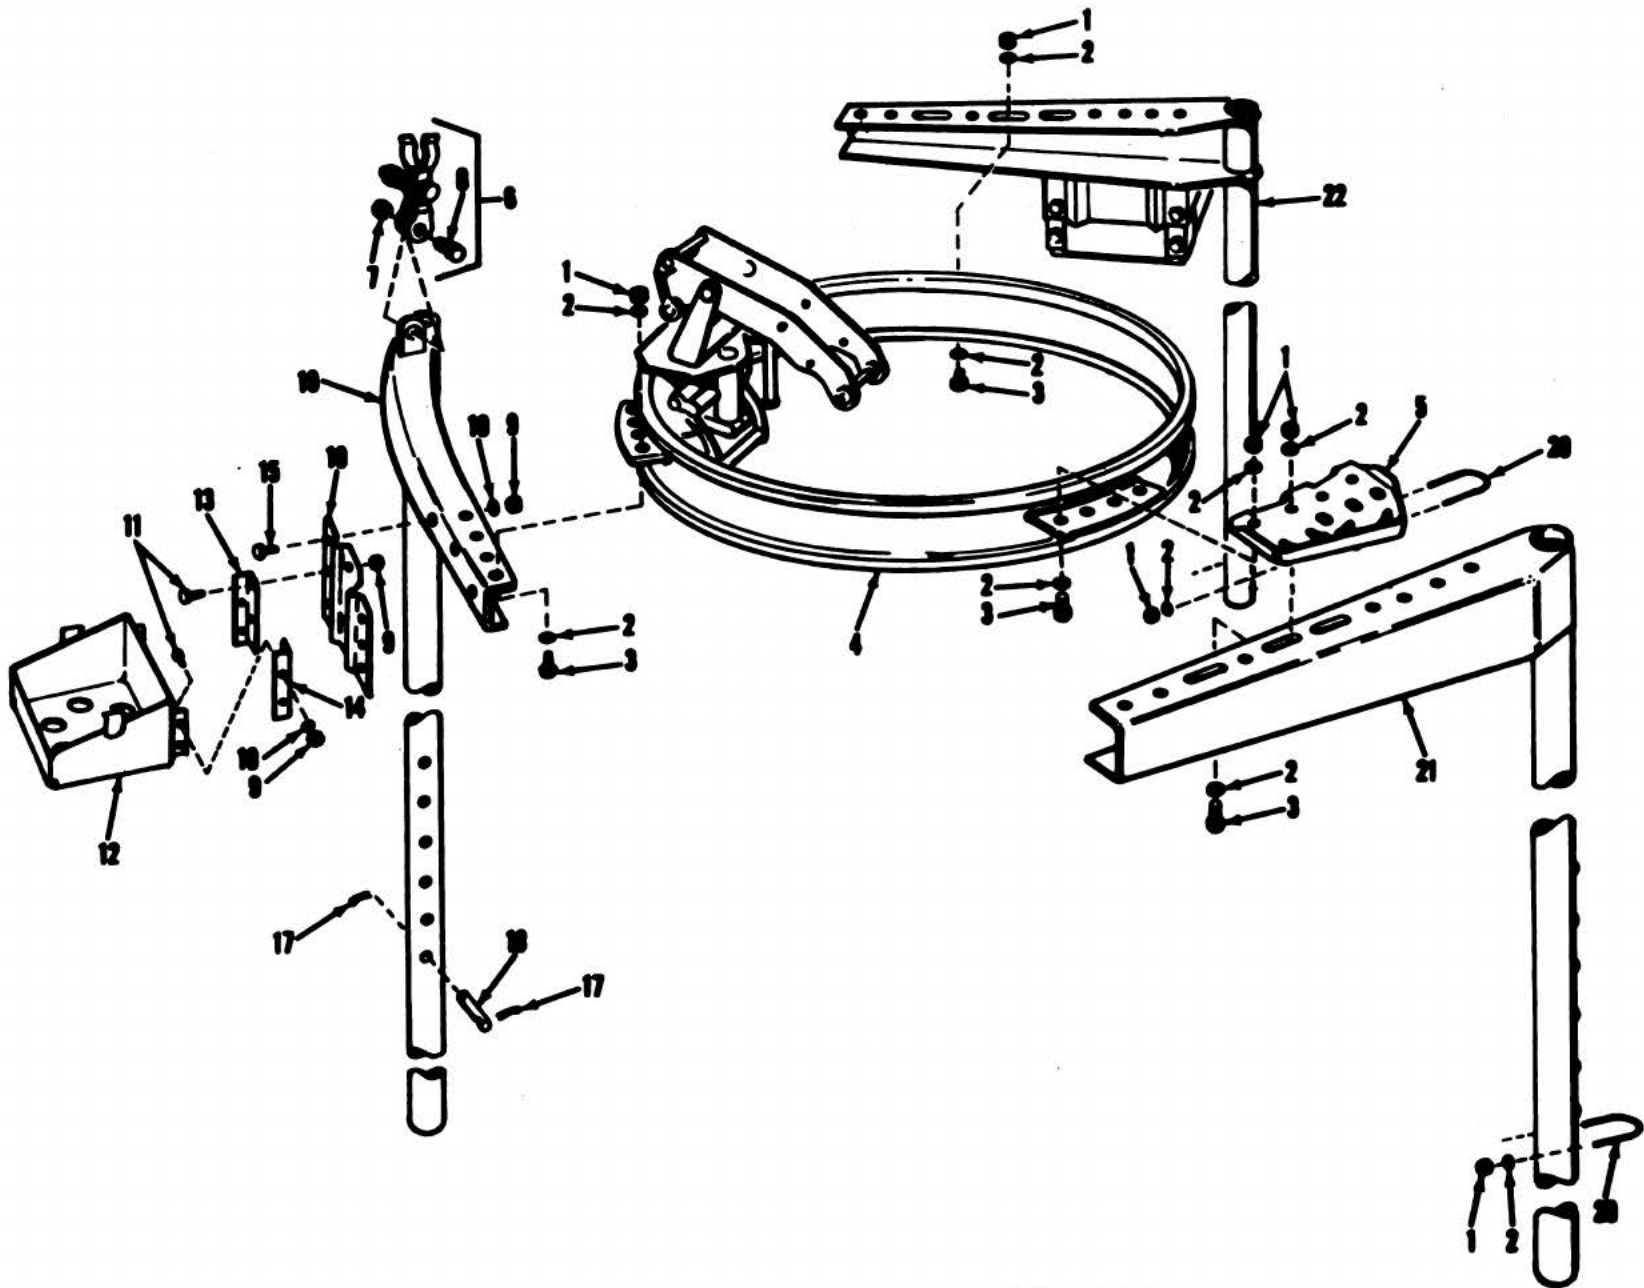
Mount, gun, ring, M36-8408948 -partially exploded view.
